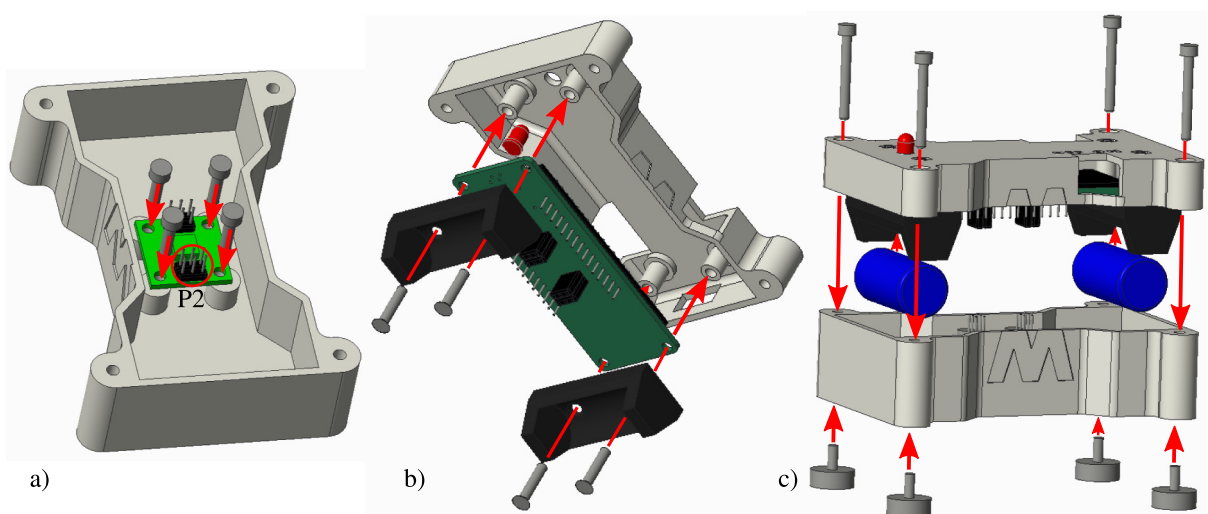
Final assembly: a) Mount the ACC. b) Mount the PCB and battery holder/holders. c) Mounting the battery/ batteries and magnets, as well as closing the enclosure.
